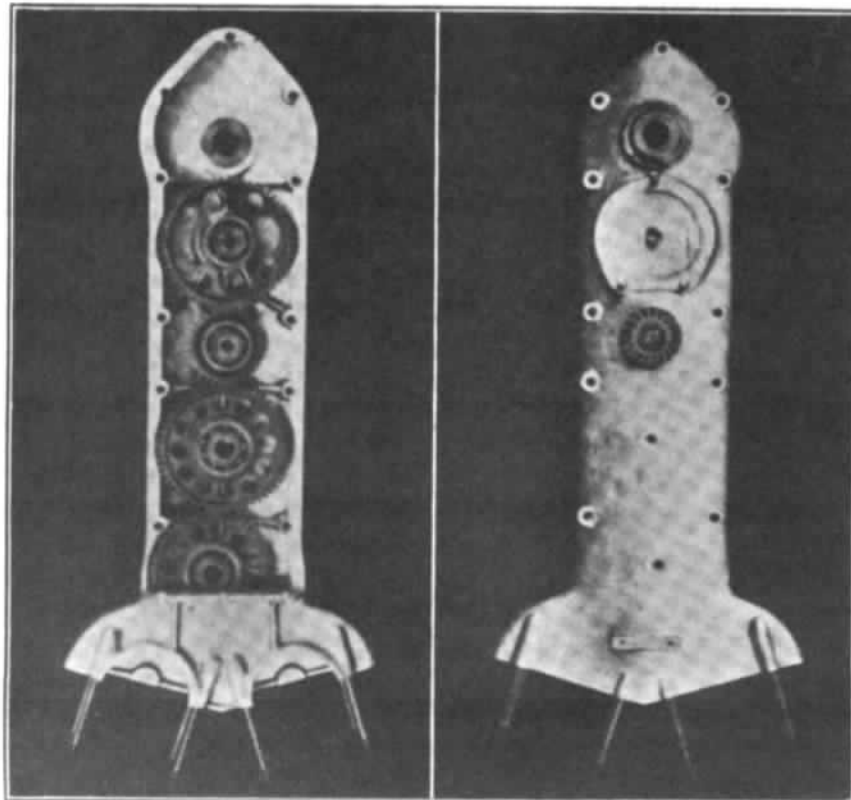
TWO VIEWS OF THE TIMING-GEAR HOUSING
